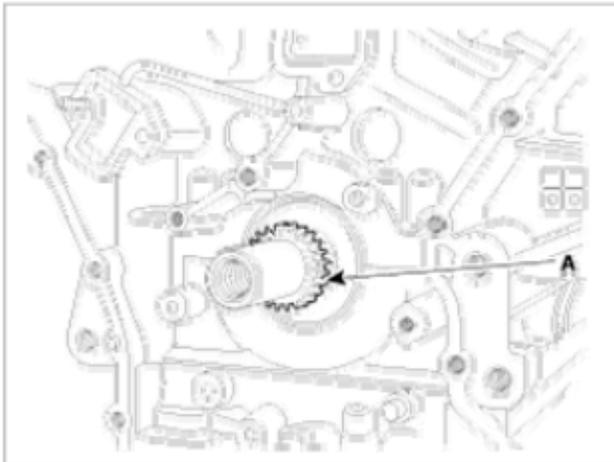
Locating Crankshaft Sprocket (LH Camshaft Drive)
